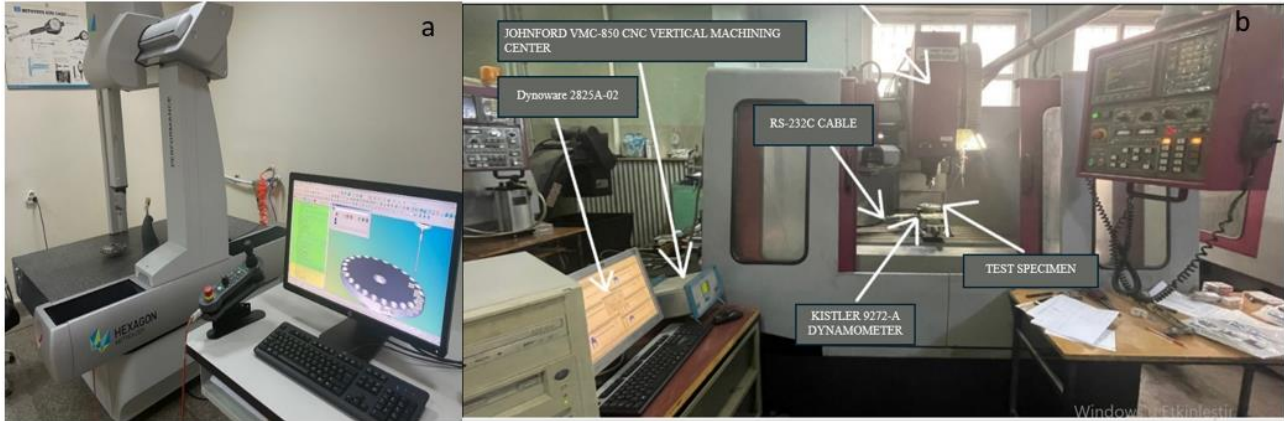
Experimental setup of the CMM (a) and JOHNFORD VMC-850 CNC vertical machining center with integrated Kistler 9272-A dynamometer, (b) Kistler 5070-A signal amplifier, and Dynoware 2825A-02 data acquisition system for machining force measurement.
